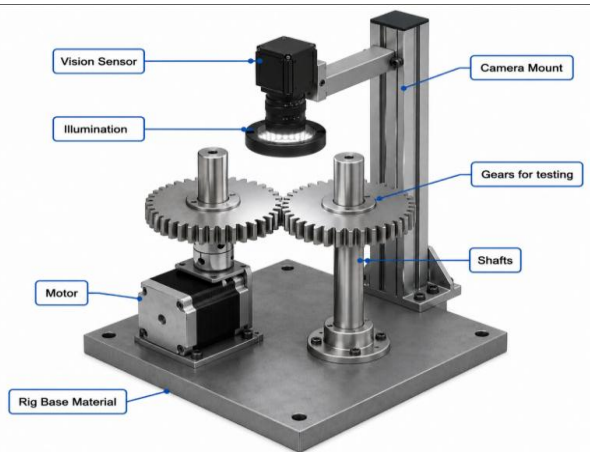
3D CAD rendering of the automated universal rig for gear backlash measurement, detailing the primary mechanical drive and overhead optical subsystems.
